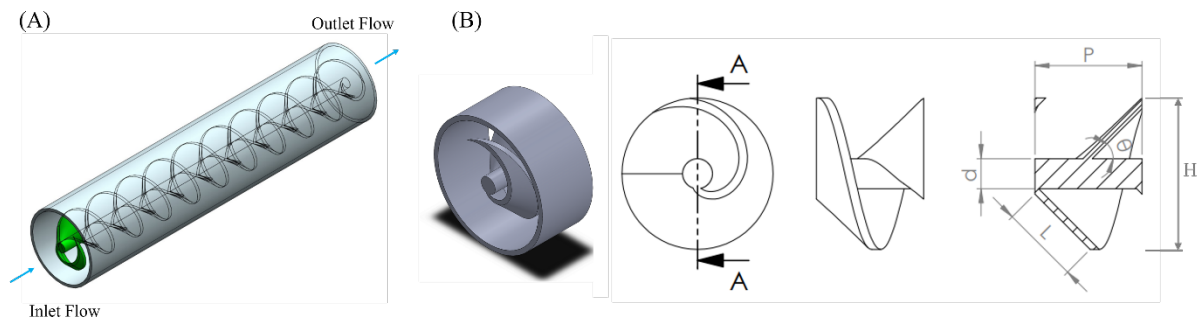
Helical inset tube assembly (A) and the physical model of helical screw insert (B)
